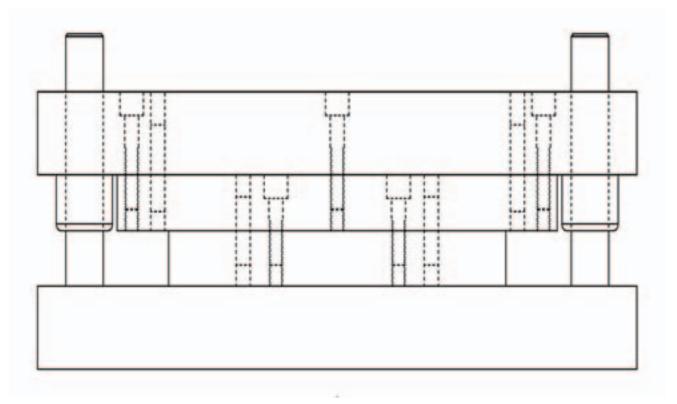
19 Mount Punch Holder Mount Punch on punch holder, then bolt and dowel punch holder to upper die set. This procedure will guarantee a perfect alignment of the punch and die sections after the die is EDMed.
